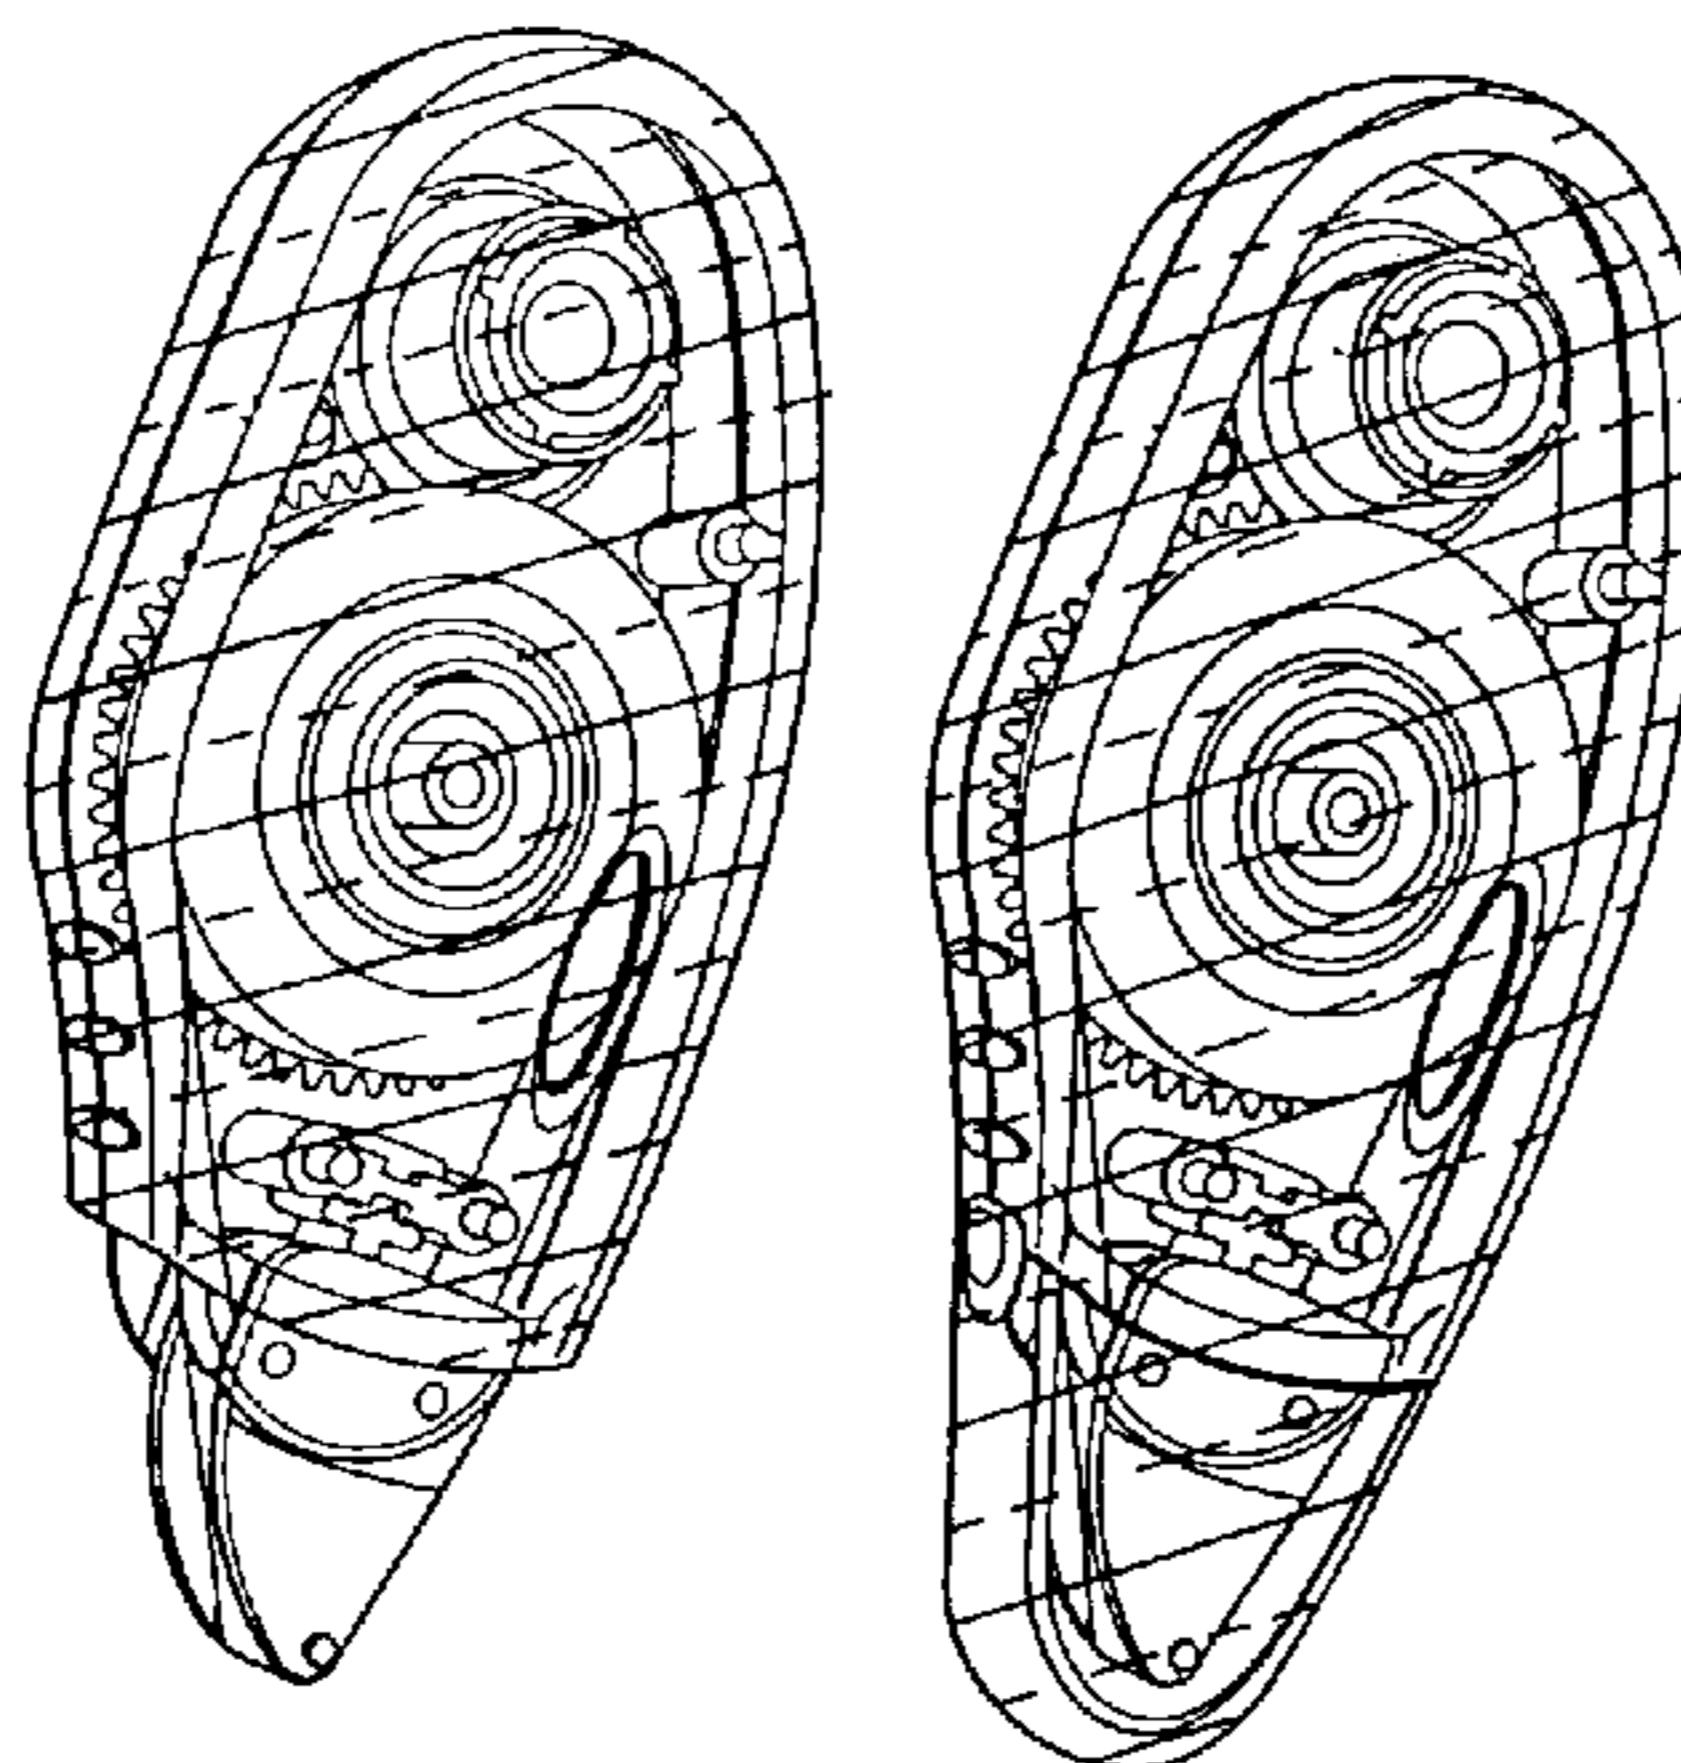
is a top view of the coating transfer device with the transfer head covered by the cap;
